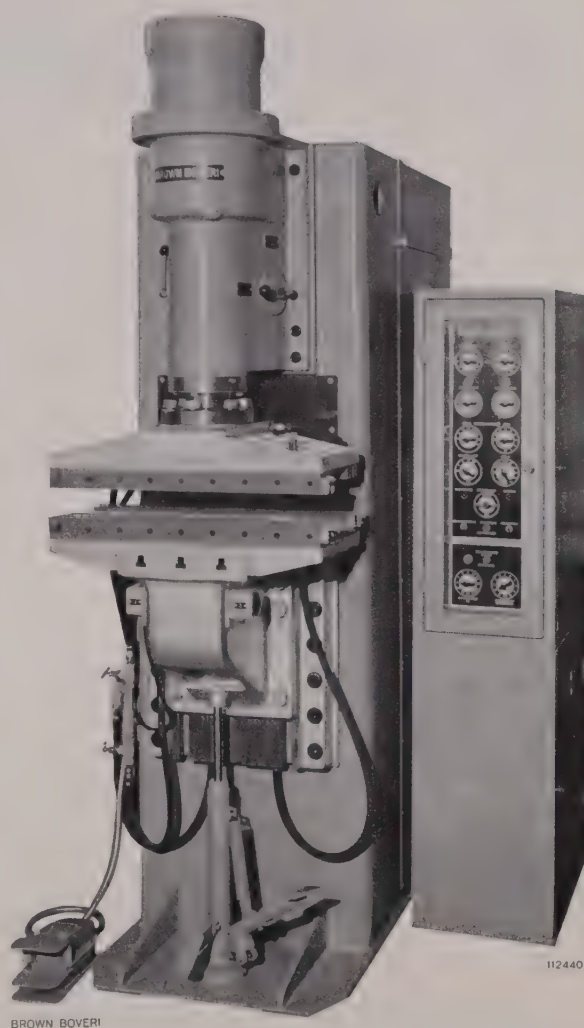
Pneumatically operated and electronically controlled projection welding machine for welding long, narrow objects
